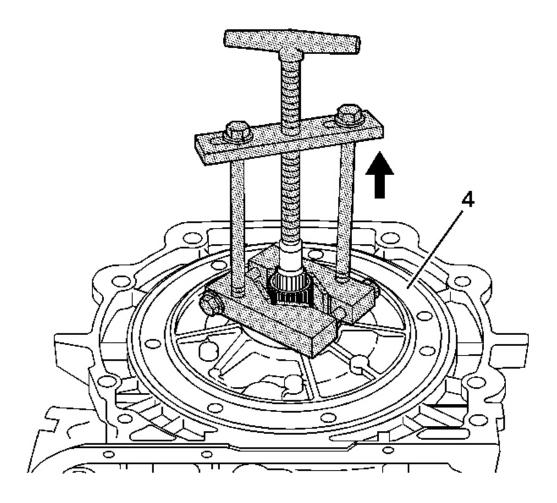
Locating Pump Assembly Courtesy of GENERAL MOTORS CORP.
